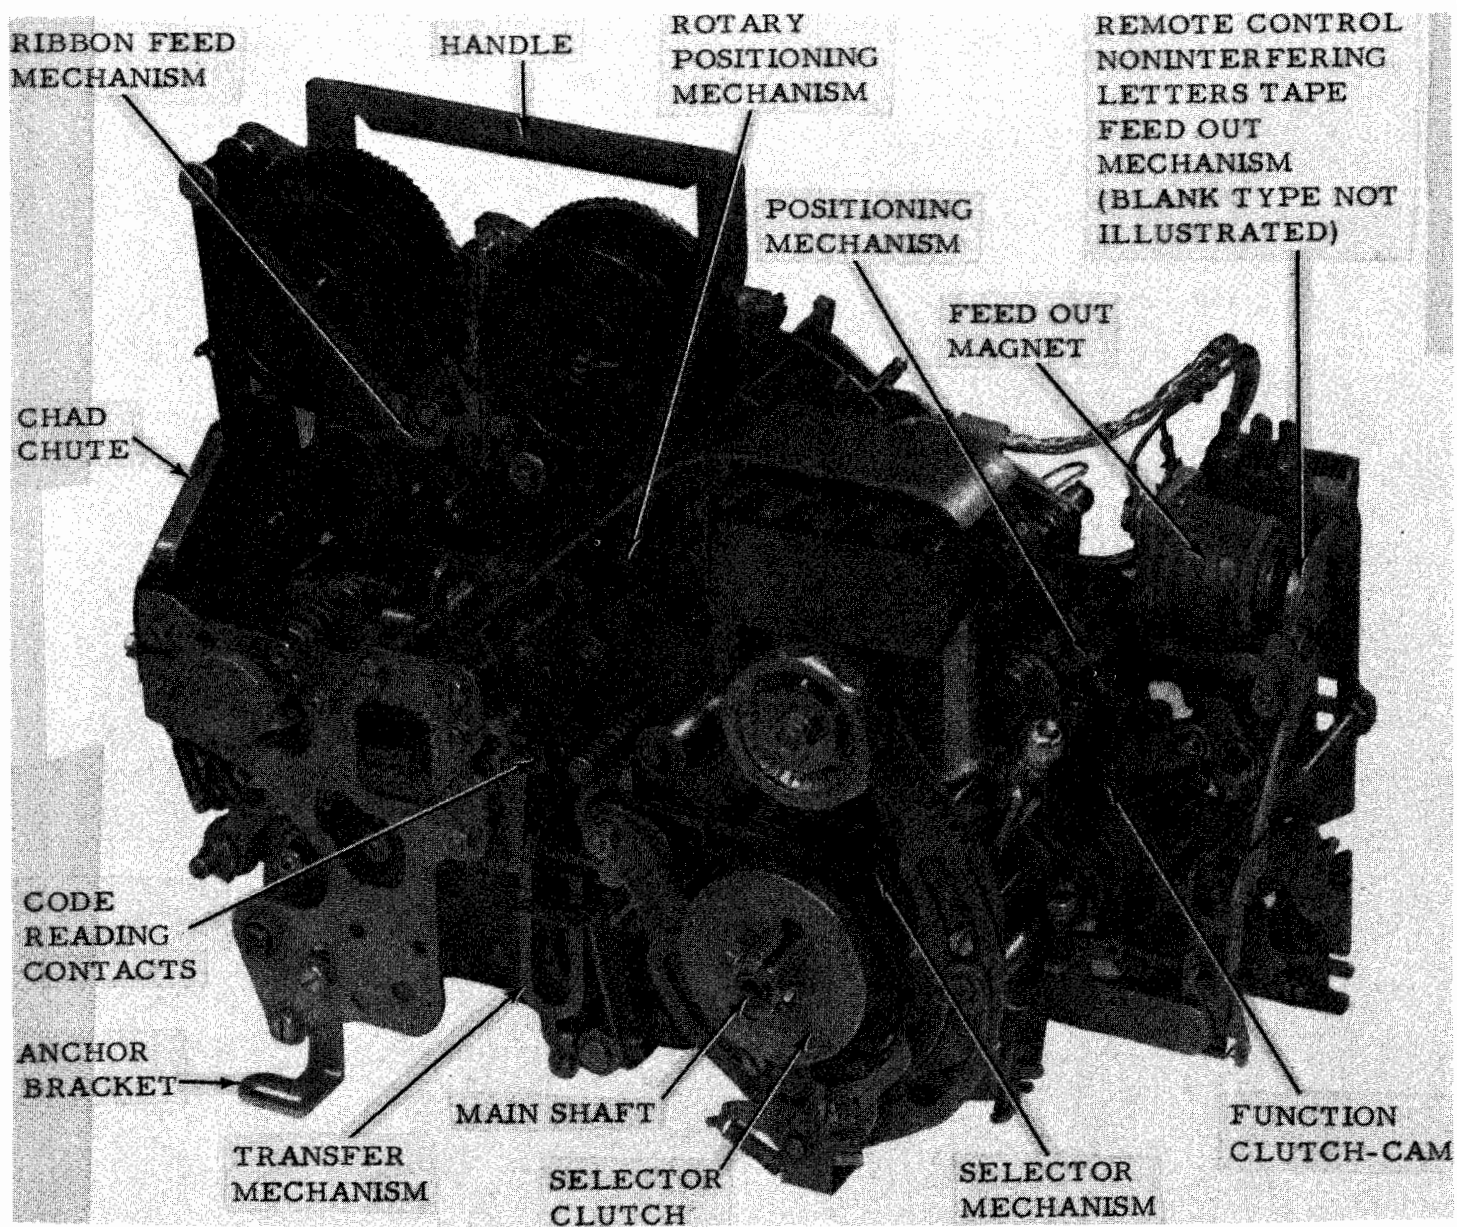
Typing Reperforator Unit Model 28, Fully-Perforated Tape, Right-Rear View
